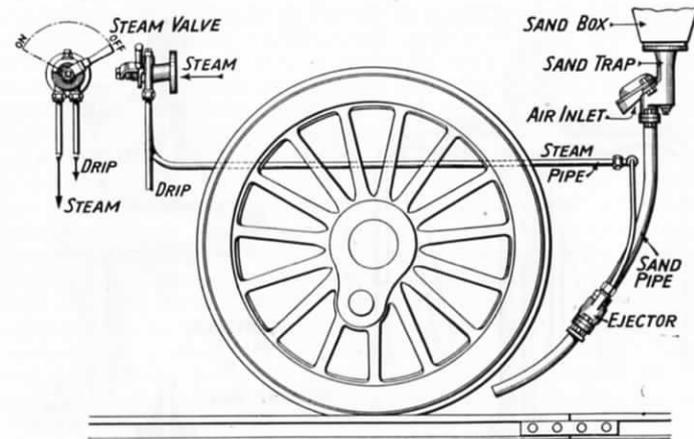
ARRANGEMENT OF STEAM SANDING GEAR FOR LOCOMOTIVES.
